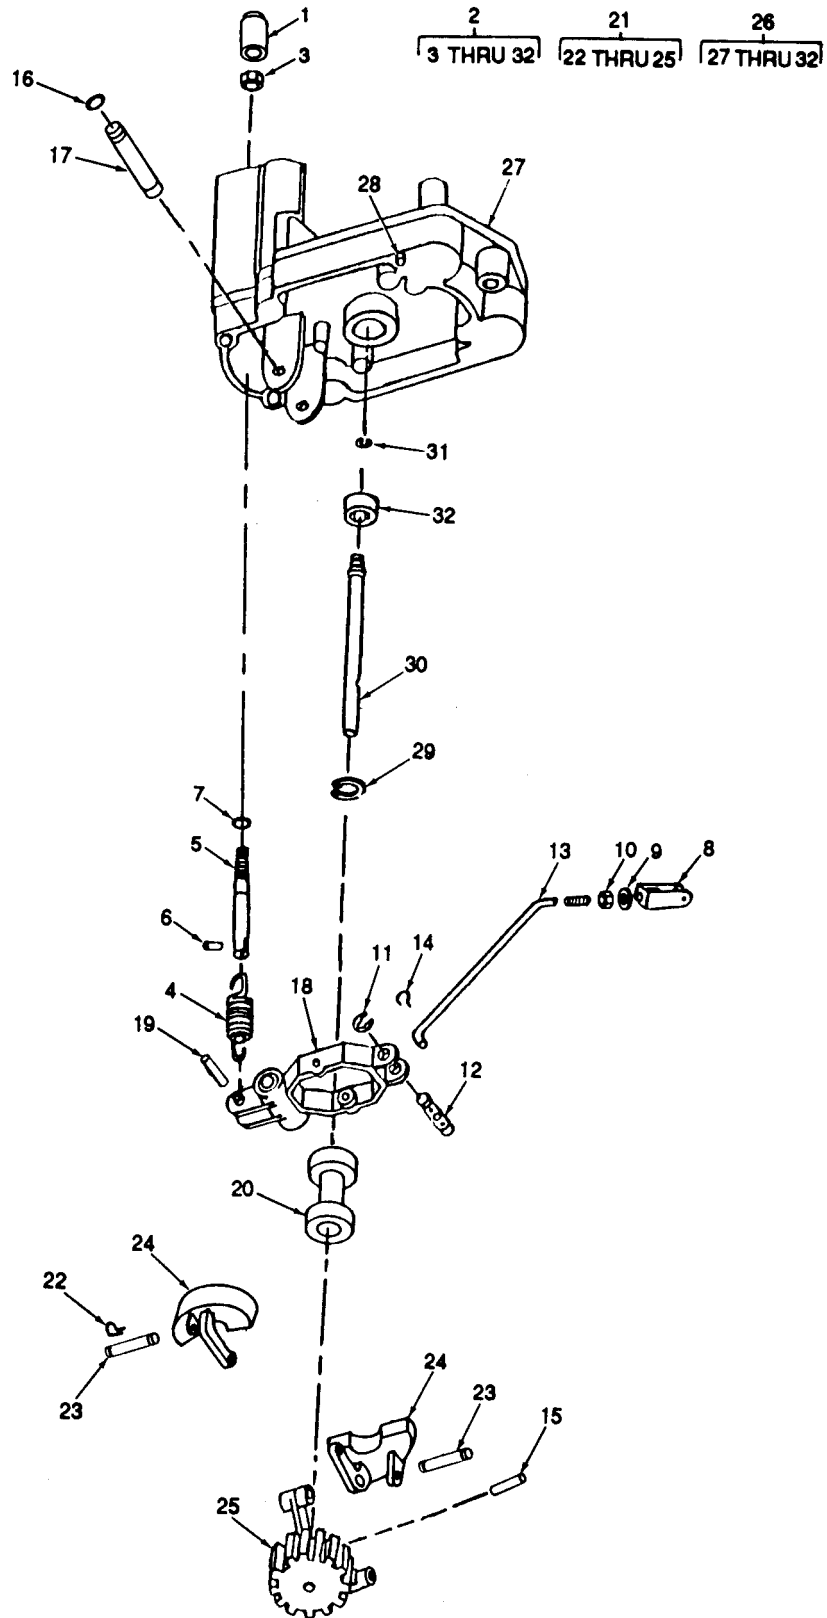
Engine Speed Governor Assembly (with Steel Gear)
